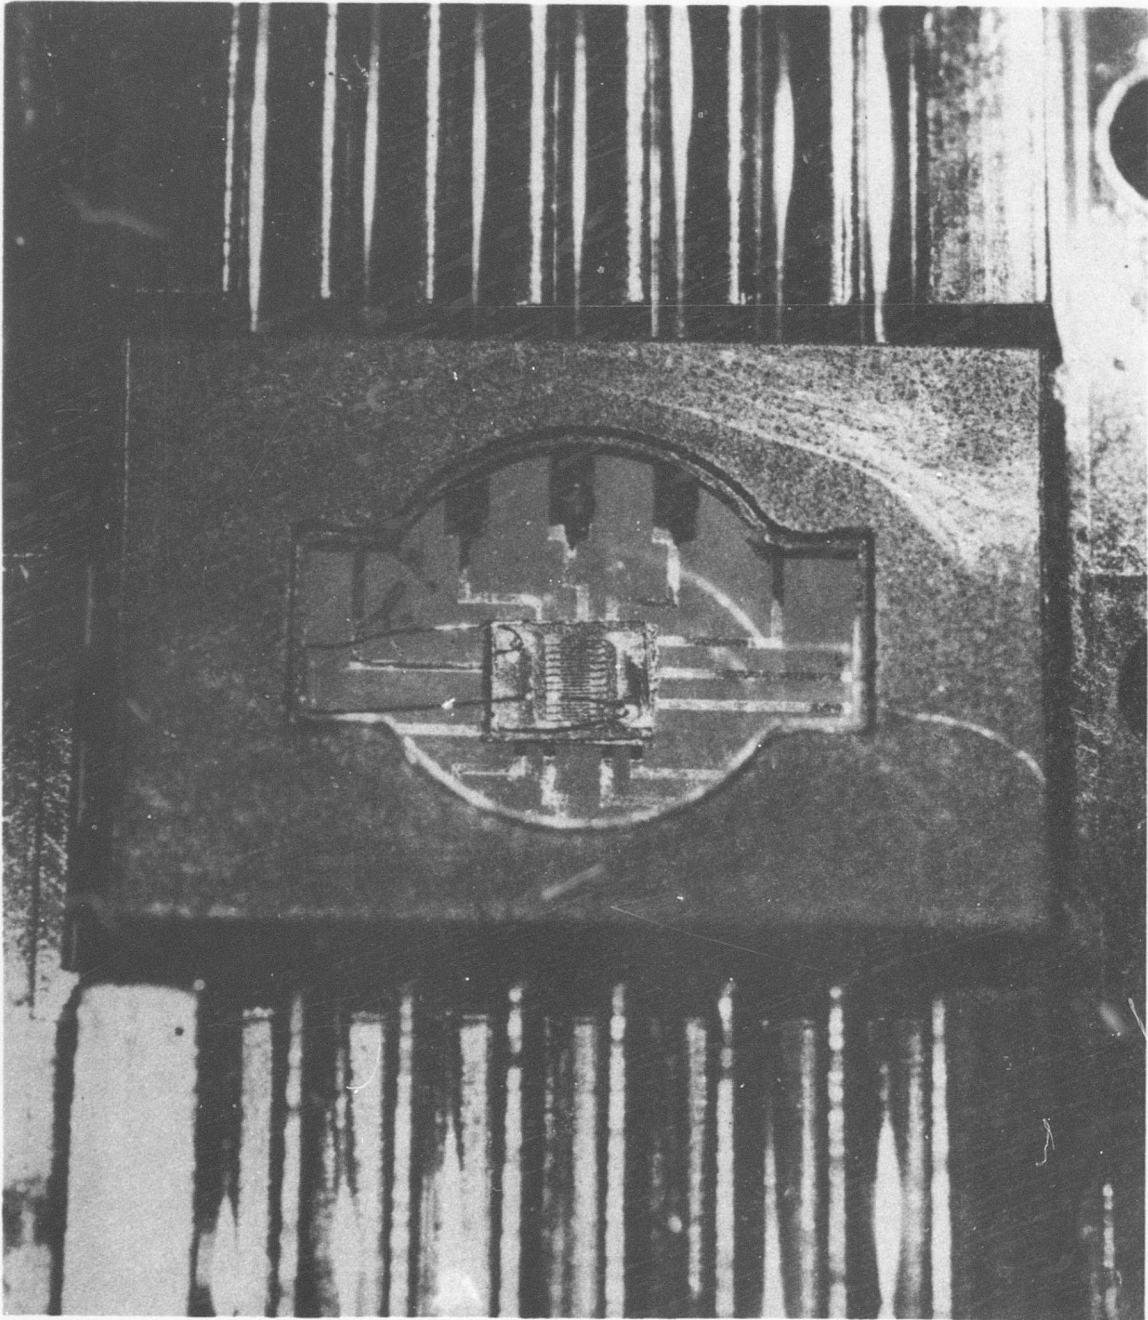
Face-Bonded Assembly With Foil Resistance Strain Gage
